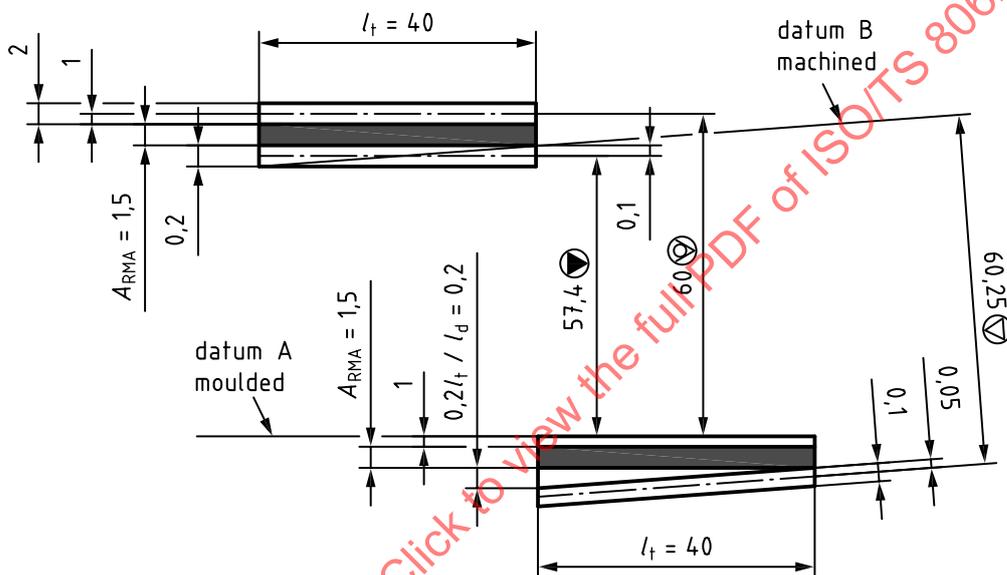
Plane relative to a plane datum (step dimension), combined drawing
